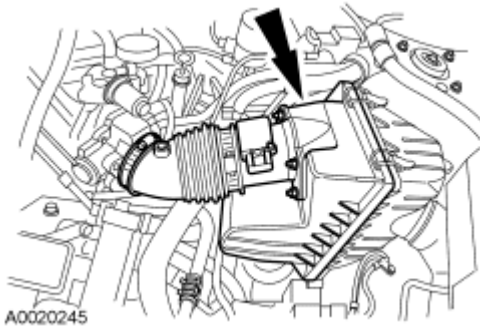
Locating Intake Tube & Air Cleaner Cover
